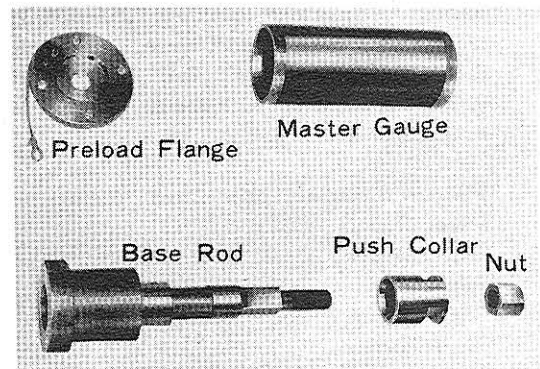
Differential Drive V5098 Pinion Adjusting Gauge
